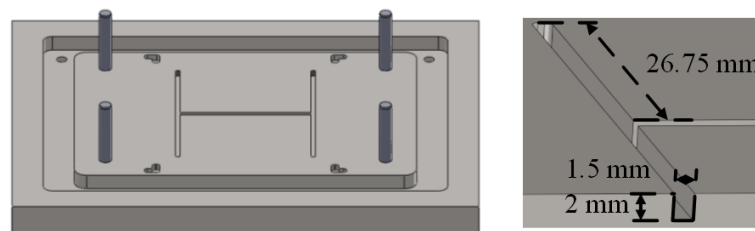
The plate bending jig with the grooves for placing a support frame along the boundary, the groove for bending the plate in, the dowel pins and the 90° alignment corners. On the right side, a cross-section of the bending groove is shown. It is 2 mm deep, 1.5 mm wide and 55 mm long on the two side arms of the frame to be made and 45 mm long for the central arm.
